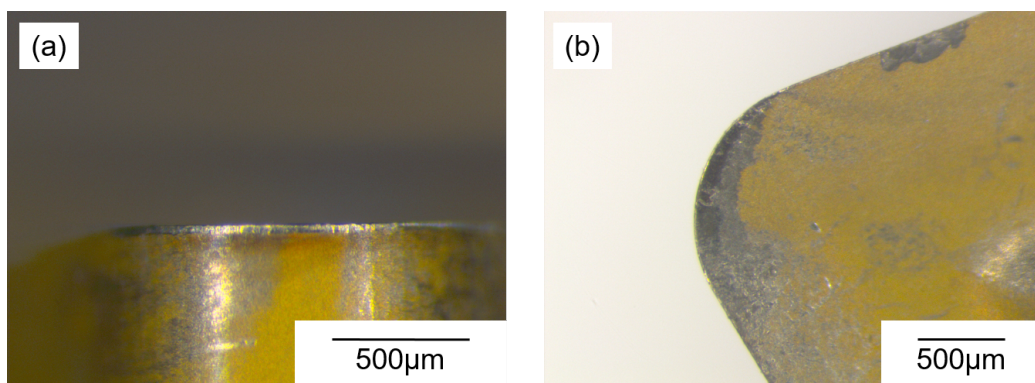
Example tool wear produced during face turning of face 4 on billet 3_2. The tool shown was used during the 1st repeat of face 4. The tool shown is representative of all passes performed on face 4.
